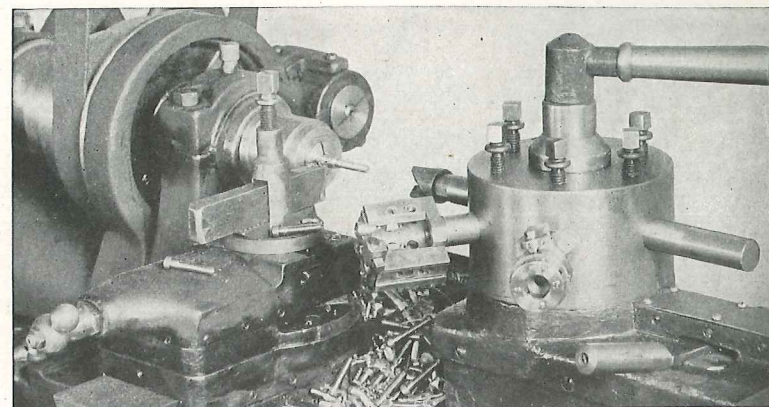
A screw cutting lathe fitted with Draw-in Collet Chuck Attachment and hand lever turret, for making small screws. Note the box tool and the threading die.
